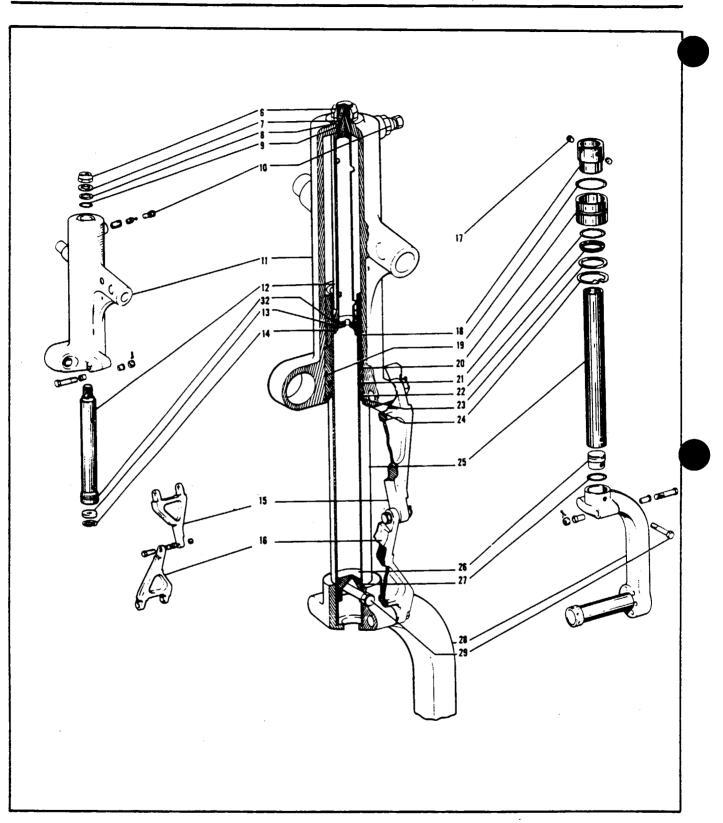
Main Gear Oleo Strut Assembly (cont.)
